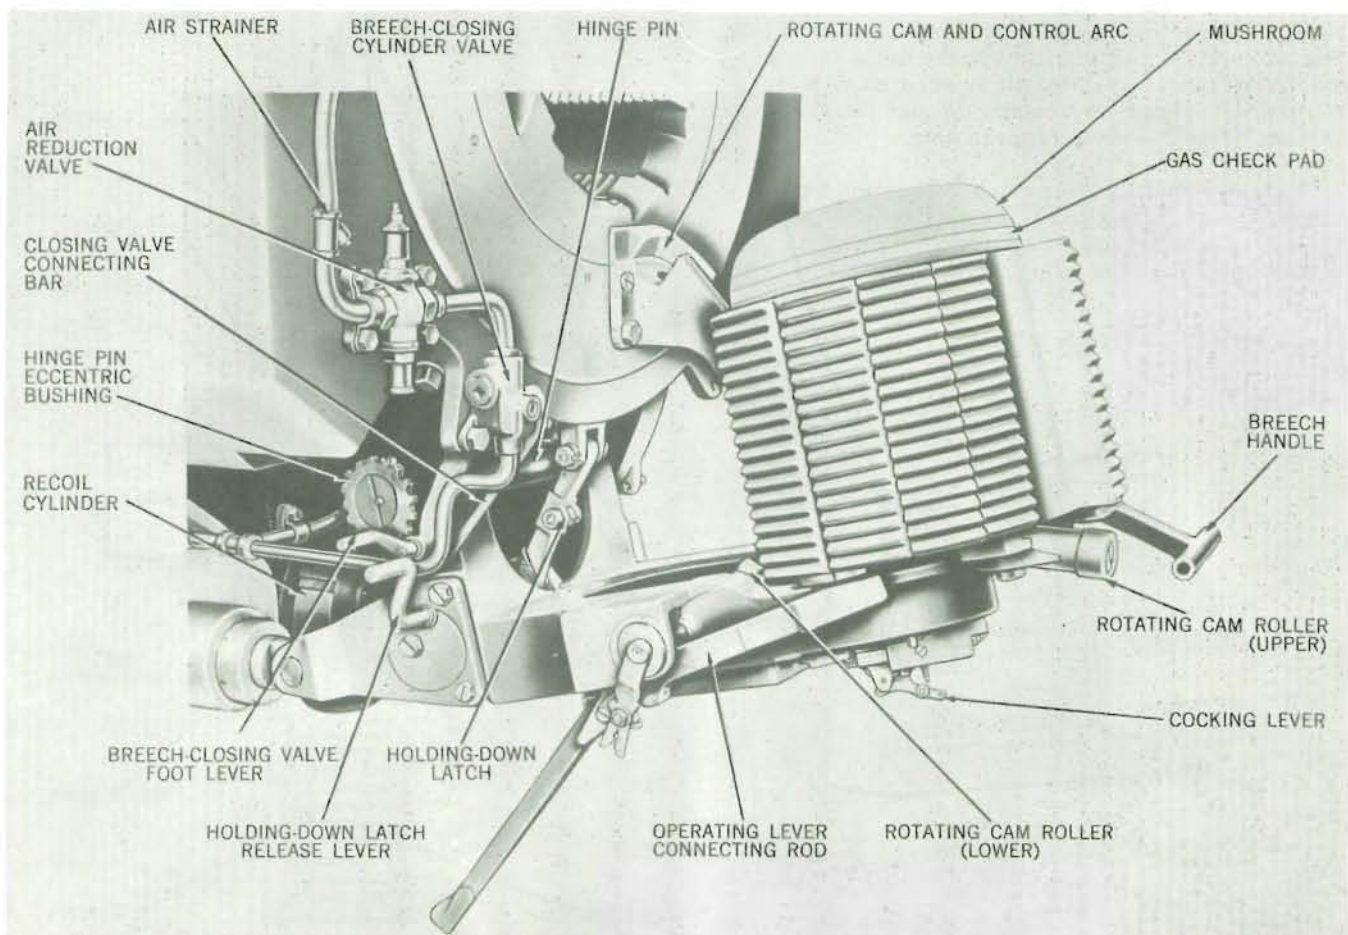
16-inch Breech Mechanism Mk 4 Mod 0 - Breech Open Showing Holding-down Latch (Operating Lever Safety Latch Mechanism Assembly Not Shown; See Figure 3-3)
